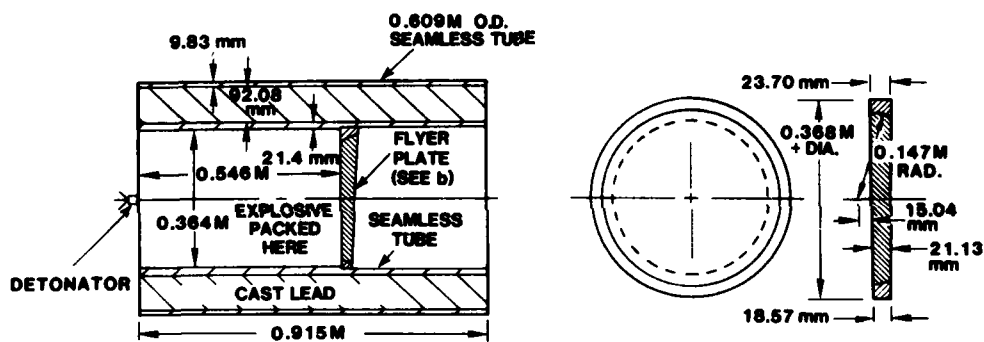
shows a sketch and Figure 8 is a photograph of the explosive barrel system for the 90.812-kg (200 lb) explosive charge used for the combined heating/impact tests. The barrel weighed 1816 kg (4000 lb). The flyer plate was 0.368 m (14.5 in) in diameter and
